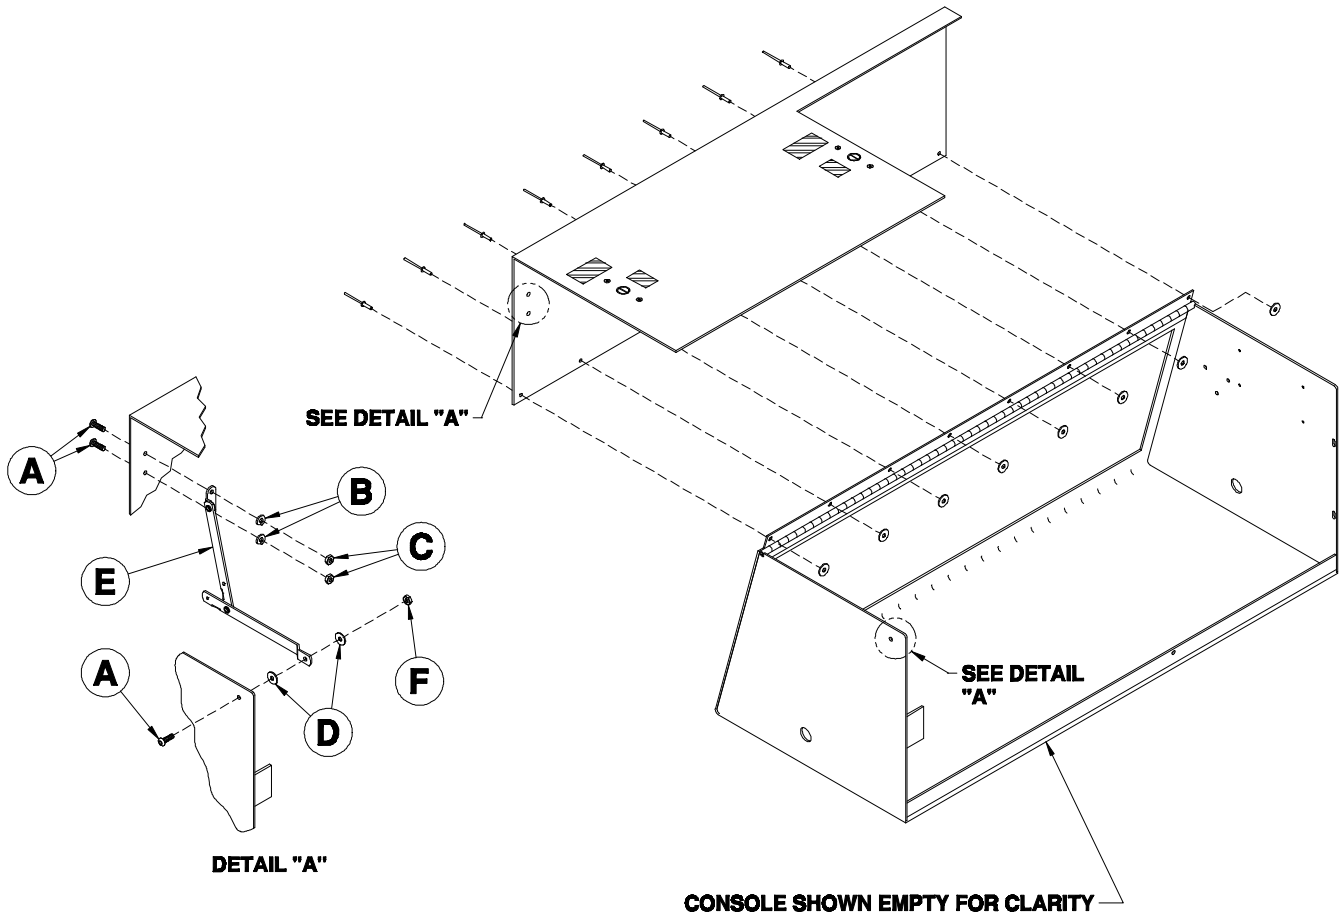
H-2000 Assembly (Part No. 15000-SIZE) Exploded View Sheet 1 of 4
